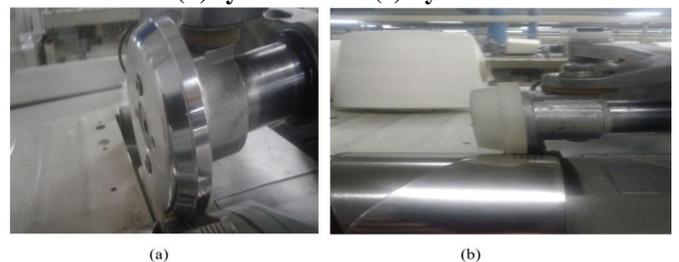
Adapter in winding machine (a) Mild steel (b) Nylon
